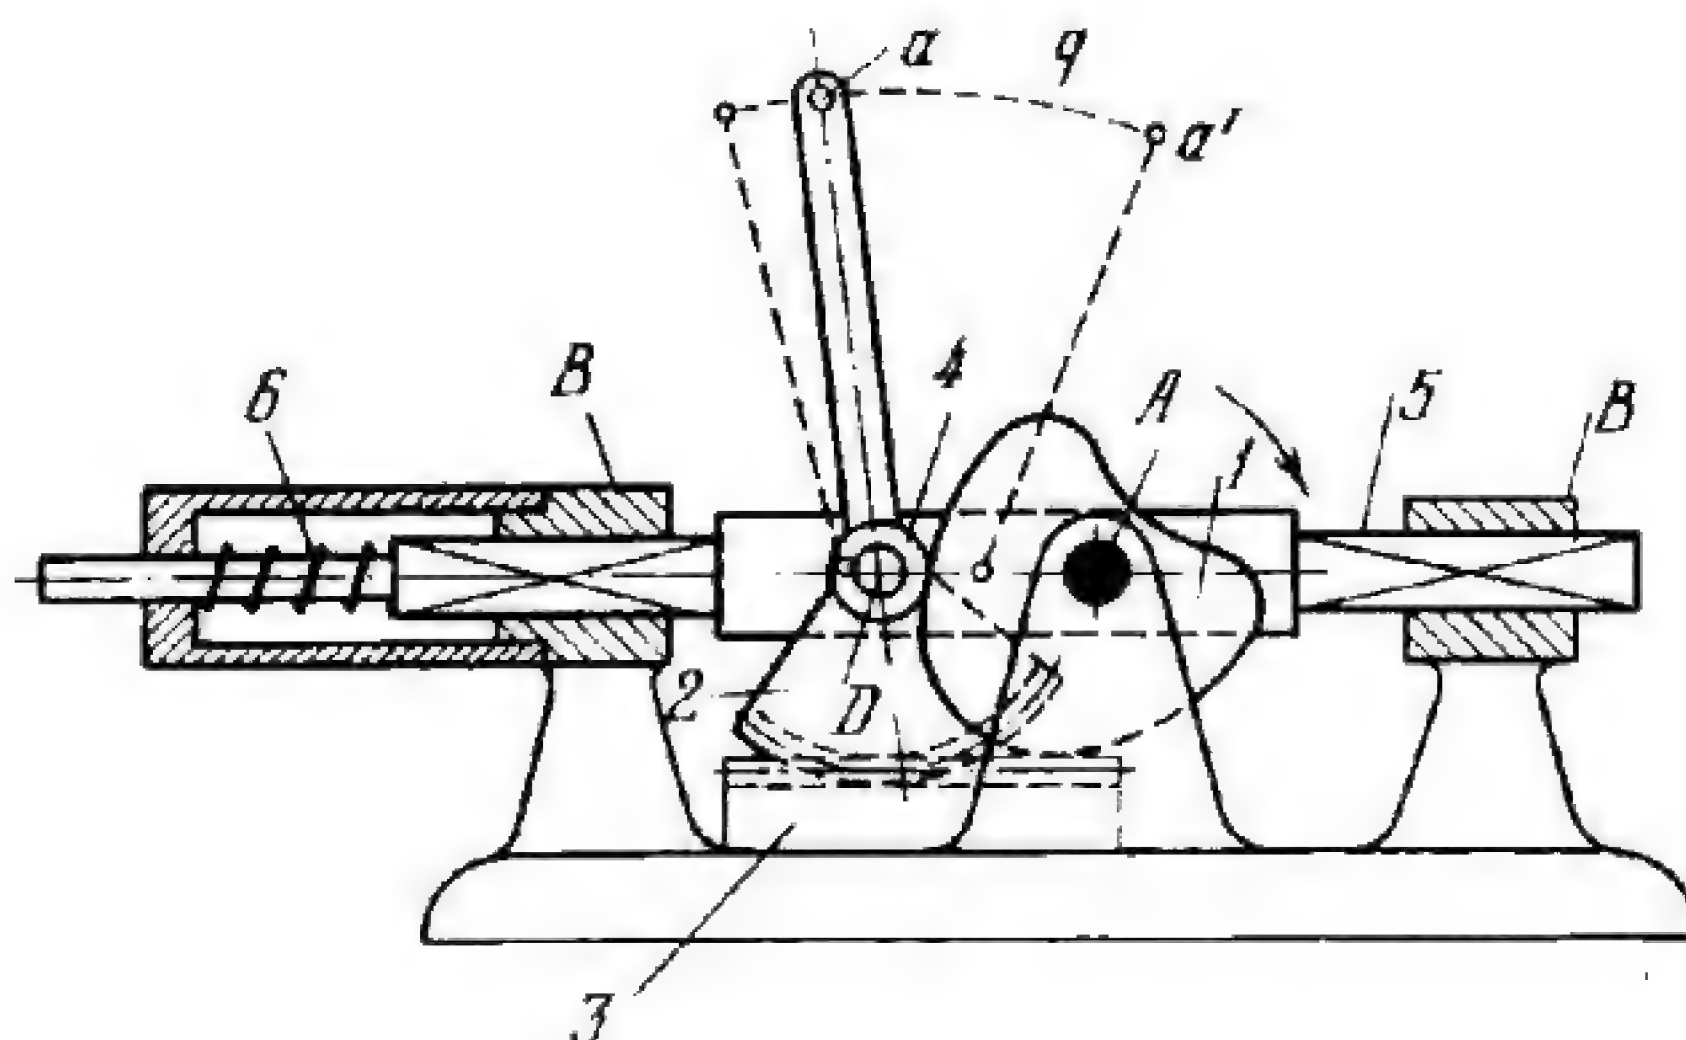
rotates about fixed axis A. Follower 5 reciprocates in fixed guides B-B and carries roller 4 which rolls along the contour of cam 1. Follower 5 is connected by turning pair D to segment gear 2 which meshes with fixed rack 3. When cam 1 rotates, segment gear 2 rolls along rack 3 and its point a travels along path q which is a portion of a prolate cycloid. In the extreme position, when point a reaches point a', the mechanism becomes locked and segment gear 2 is indexed in this position. The mechanism is brought out of the indexed position by pushing follower 5 to the left and compressing spring 6.
